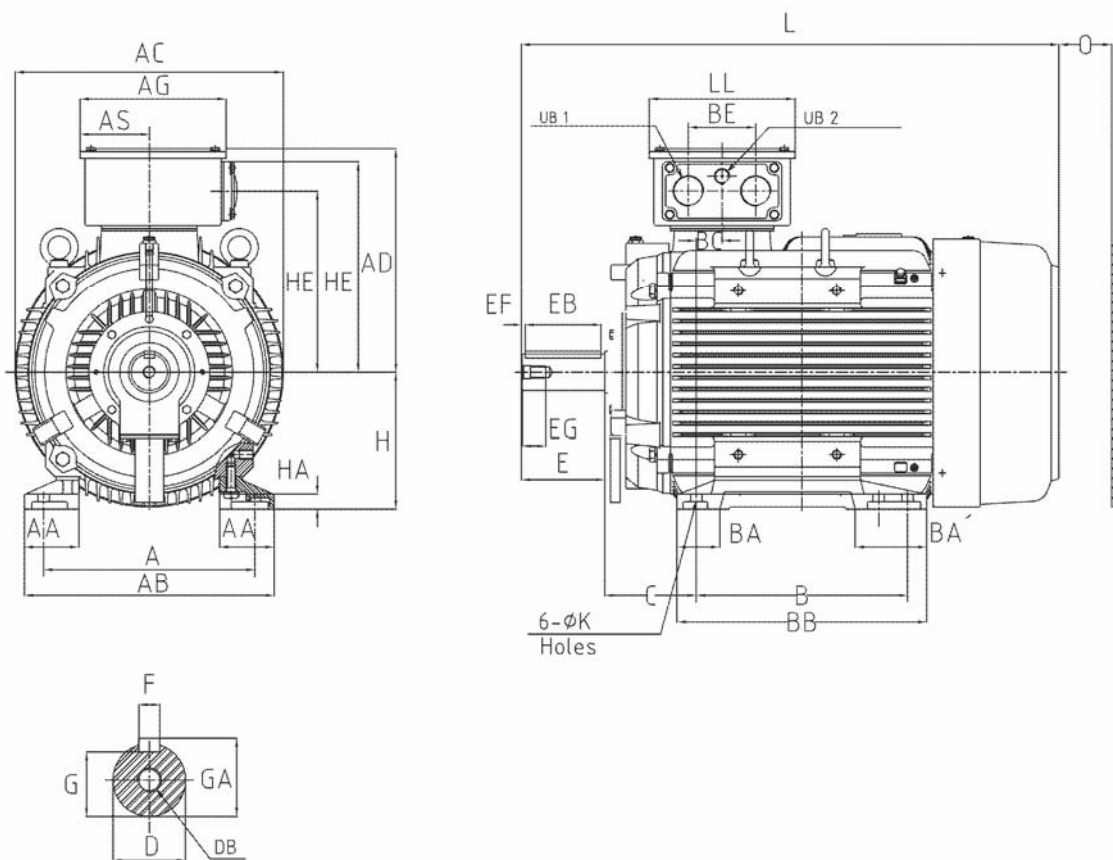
Outline drawing of cast iron design, mounting B35; frame size 160 - 180
